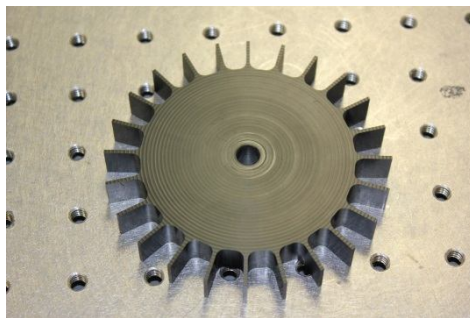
Saw tooth plastic rotor for blade 1 identification testing
